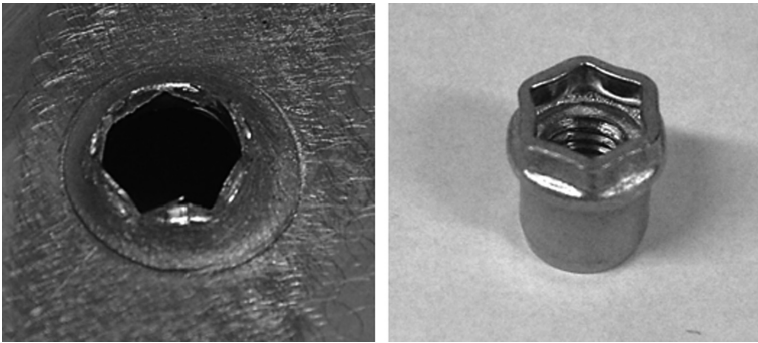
View of sample after pull-out test: aluminum profile (left) and blind rivet nut (right)
